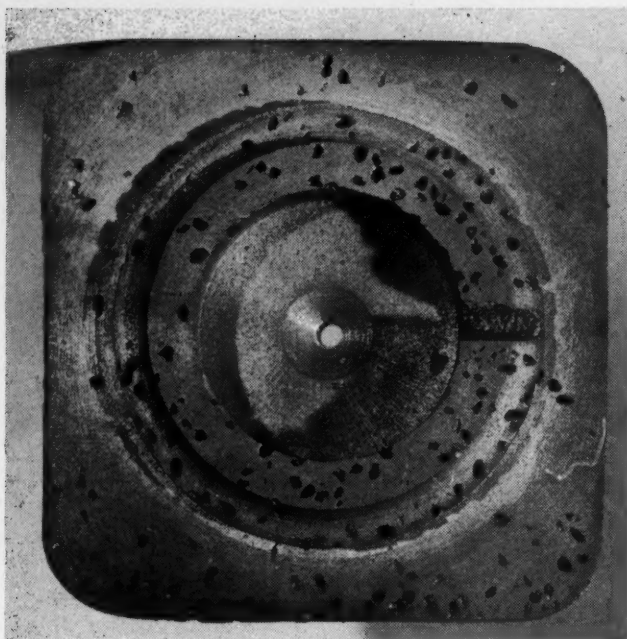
Casting Defect Caused by Boiling Ladle. This Defect Has Been Duplicated in Tests a Number of Times.
